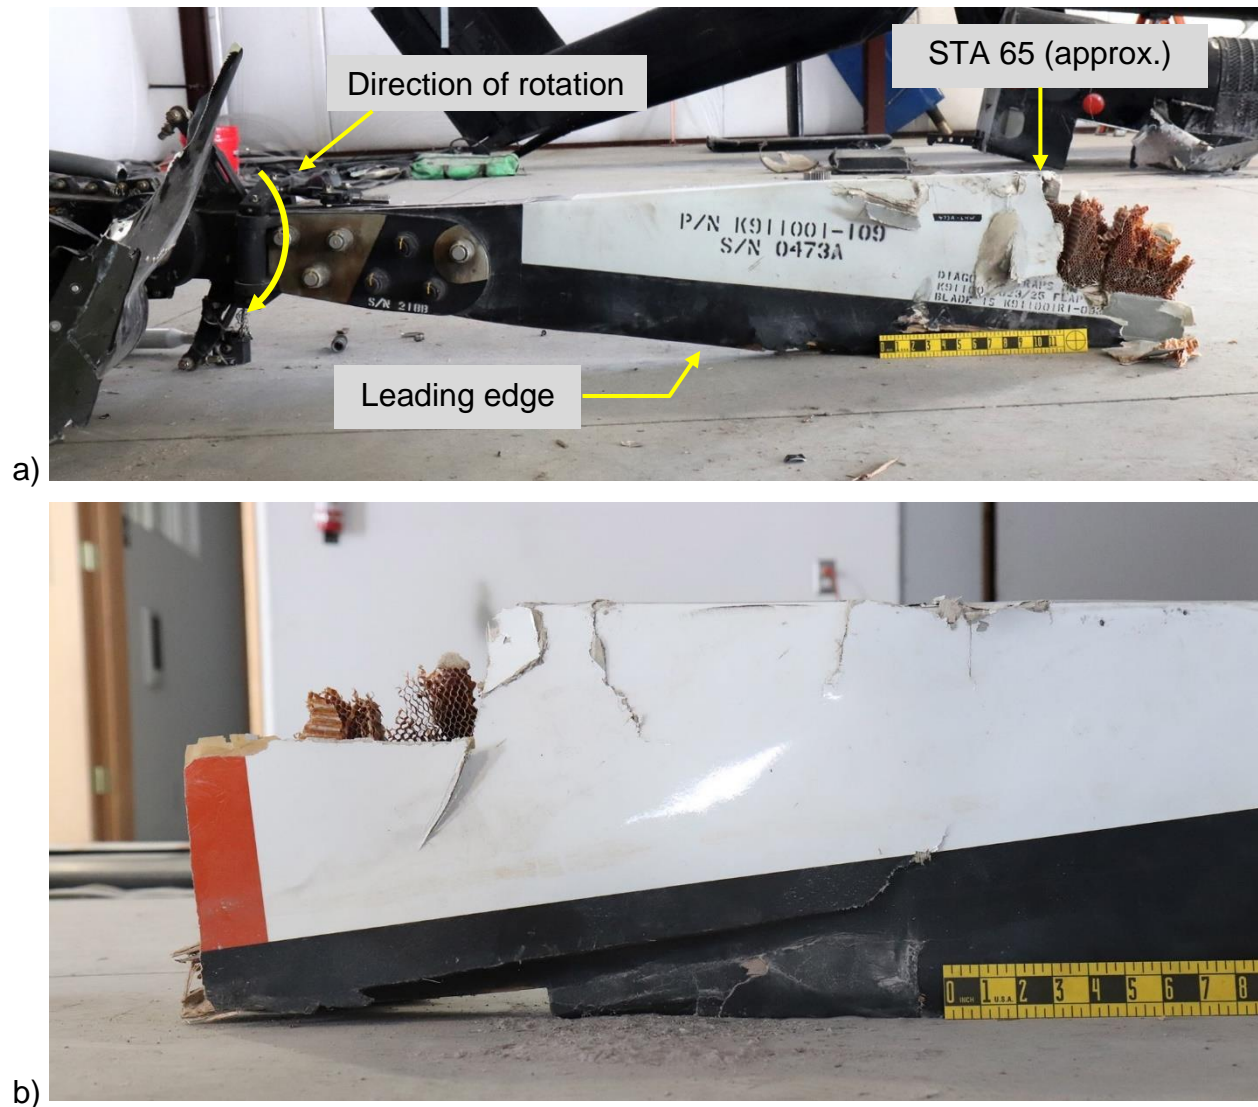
Root end of the left hand white (LHW) main rotor blade (473A): a) view of the lower blade surface; b) view of the upper blade surface;
